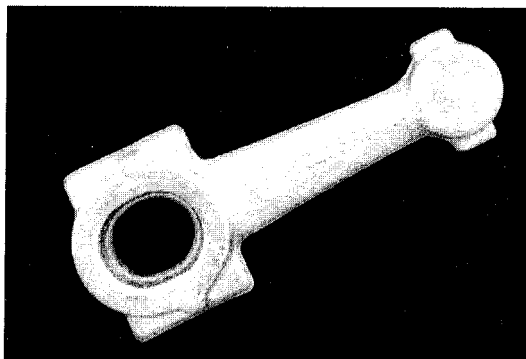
Connecting rod made in forged ZC71/SiC/12p
